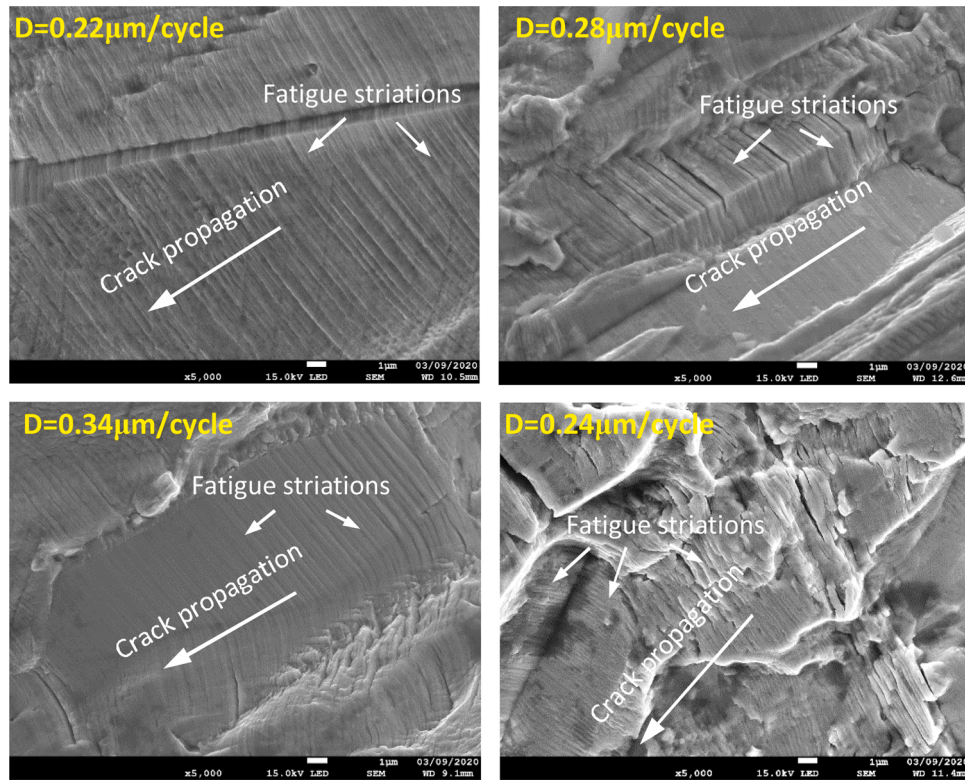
Brittle fatigue striations on the fatigue crack area: (a) Conventional finish milling, (b) Conventional rough milling, (c) laser-assisted machining, (d) abrasive waterjet cutting. All images are collected from the fractured samples under 1250 MPa maximum loading stress.
